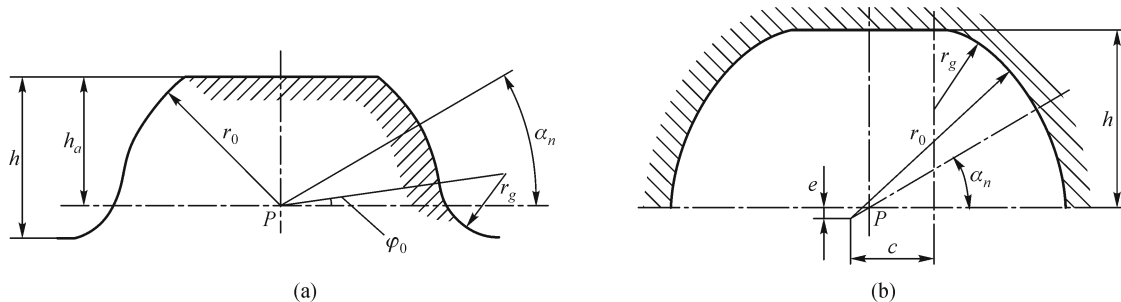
Basic geometry of the tooth profiles. (a) Pinion; (b) gear
